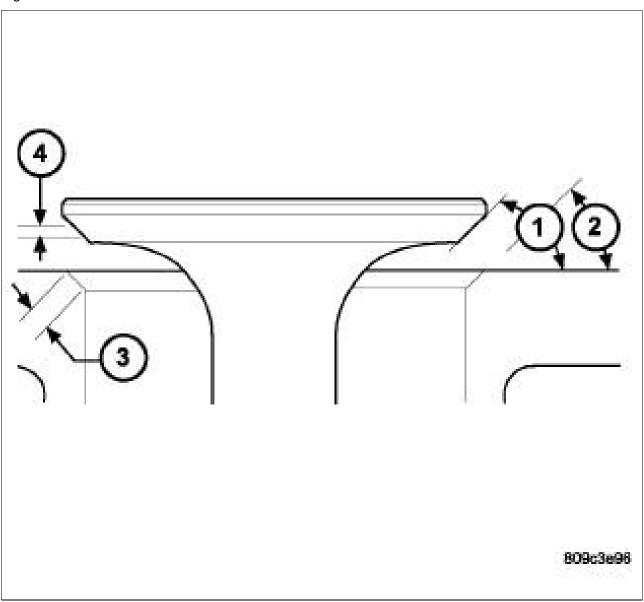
Intake Valve & Exhaust Valve Component Configuration
